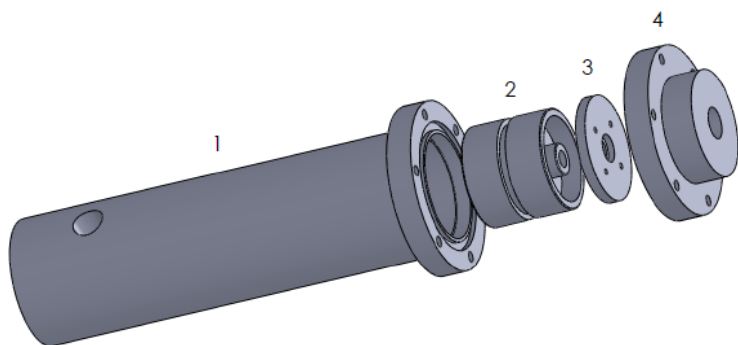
Exploded view of the variable volume cell showing: (1) blind cylinder with side-entry hydraulic pressure port and o-ring recess; (2) internal piston with o-ring recess; (3) piston retaining plate; (4) bolted end cap with pneumatic pressure port.
